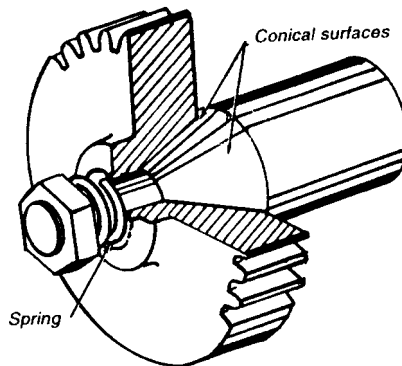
A cone clutch is formed by mating a taper on the shaft to a beveled central hole in the gear. Increasing compression on the spring by tightening the nut increases the drive's torque capacity.
